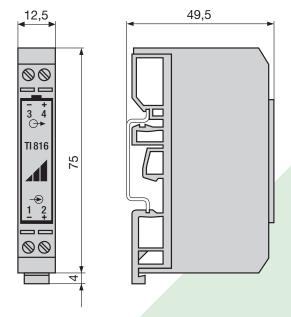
SINEAX TI 816 in carrying rail housing N12 on top-hat rail EN 50 022 - 35 \times 7.5.
